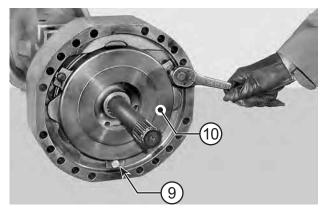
Loosen check and guide screws (9) of thrust disc (10).
